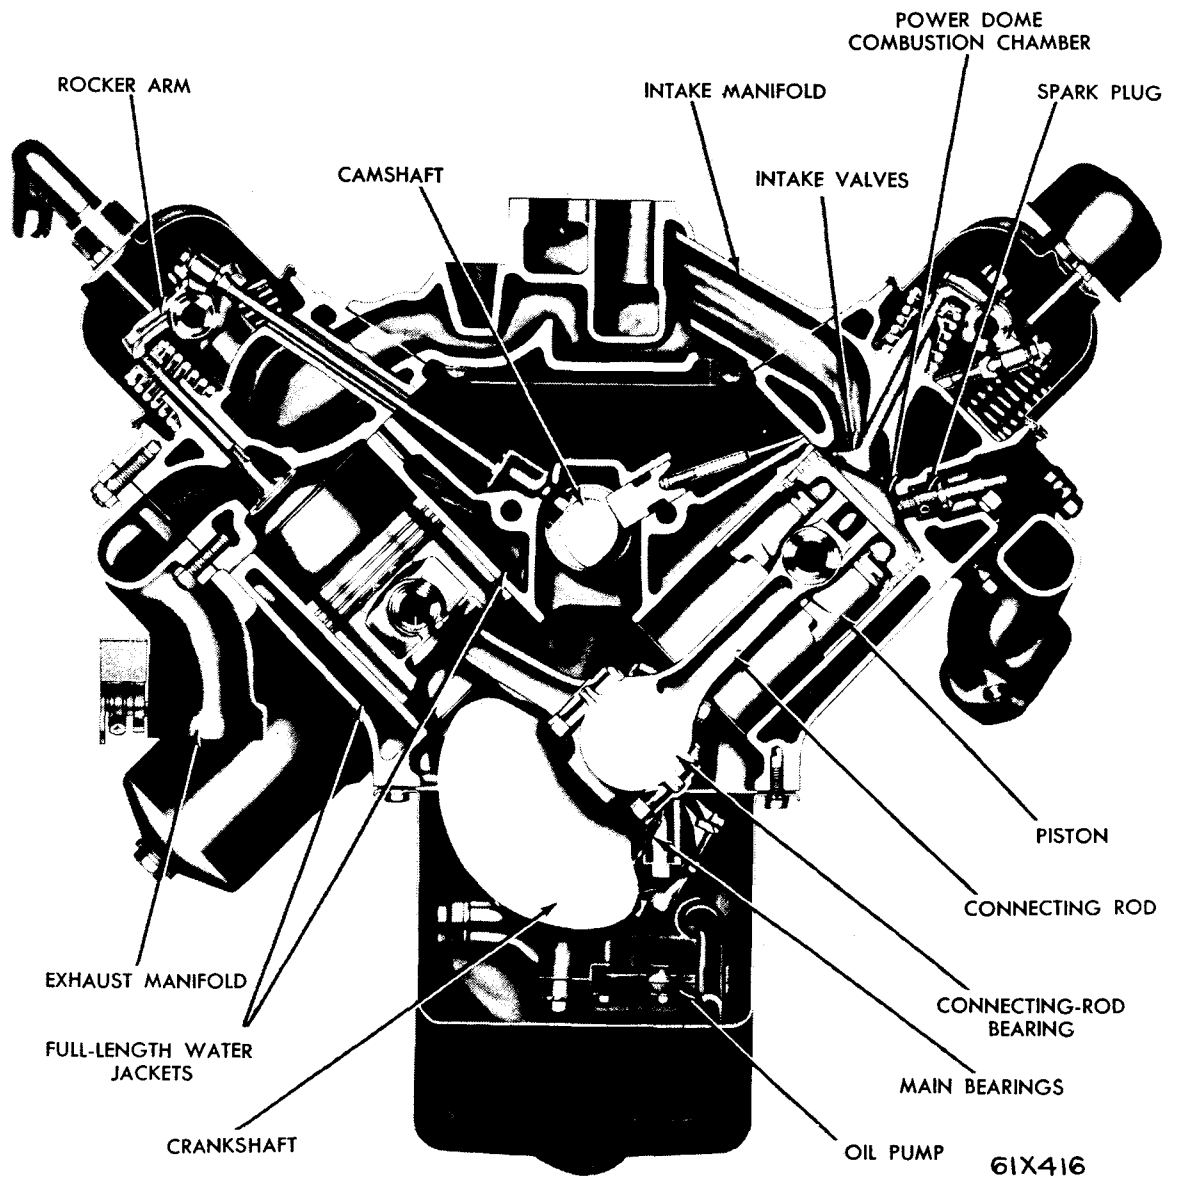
Chrysler 8-Cylinder Industrial Engine
